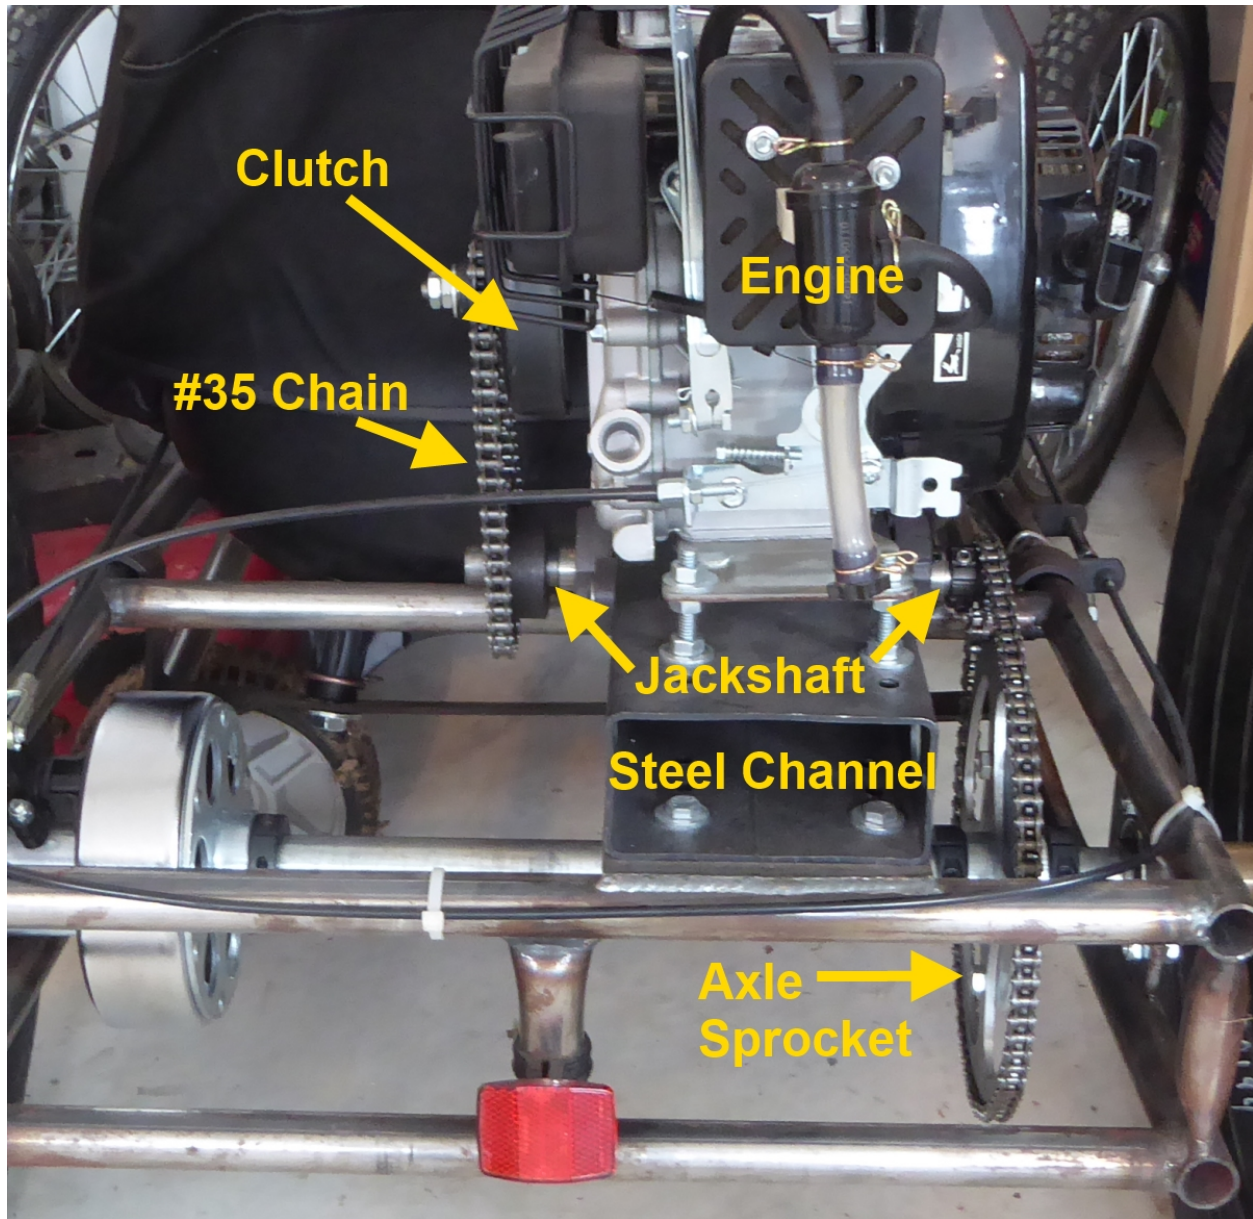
Overall view of the jackshaft drive system for the Cyclecar.
